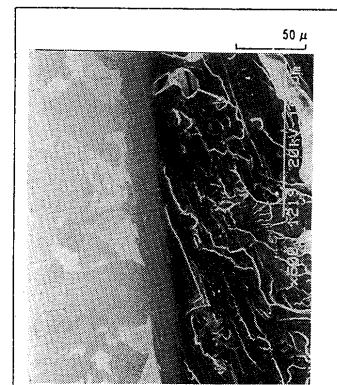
SEM examination surface and fracture at C part of weld metal ( $Q = 1,267$  KJ/cm)
